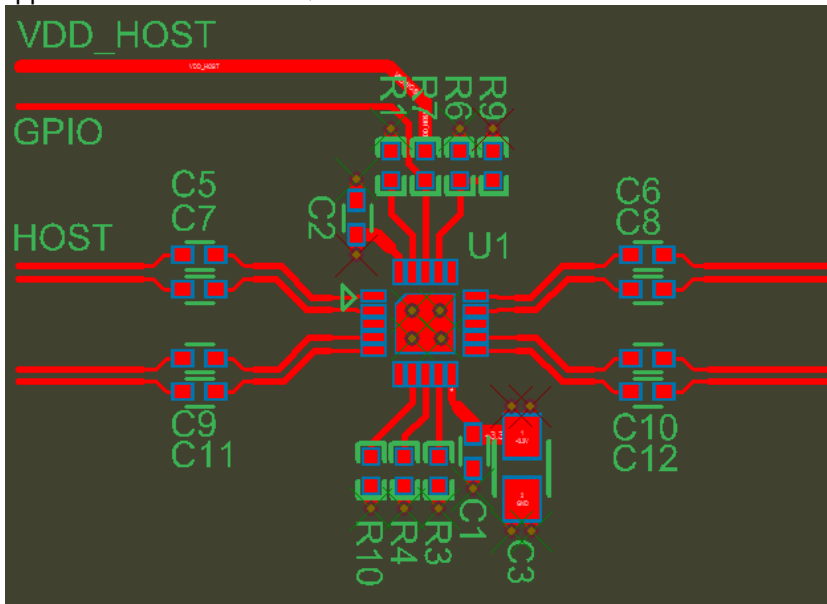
Typical Layout Routing of PI3EQX6741STBZDE
